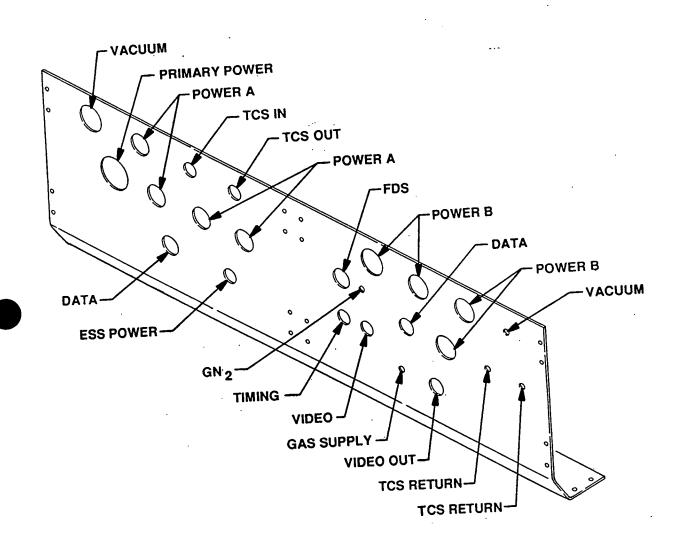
CORE RACK PANEL LAYOUT
